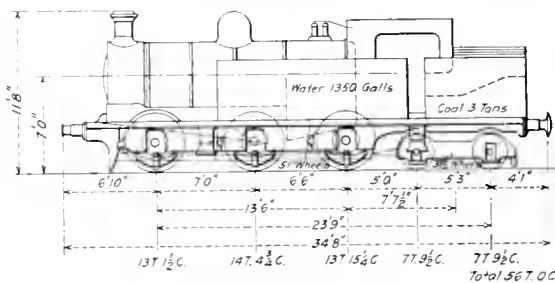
Type of Locomotive That Was Used in Making Spring Tests
